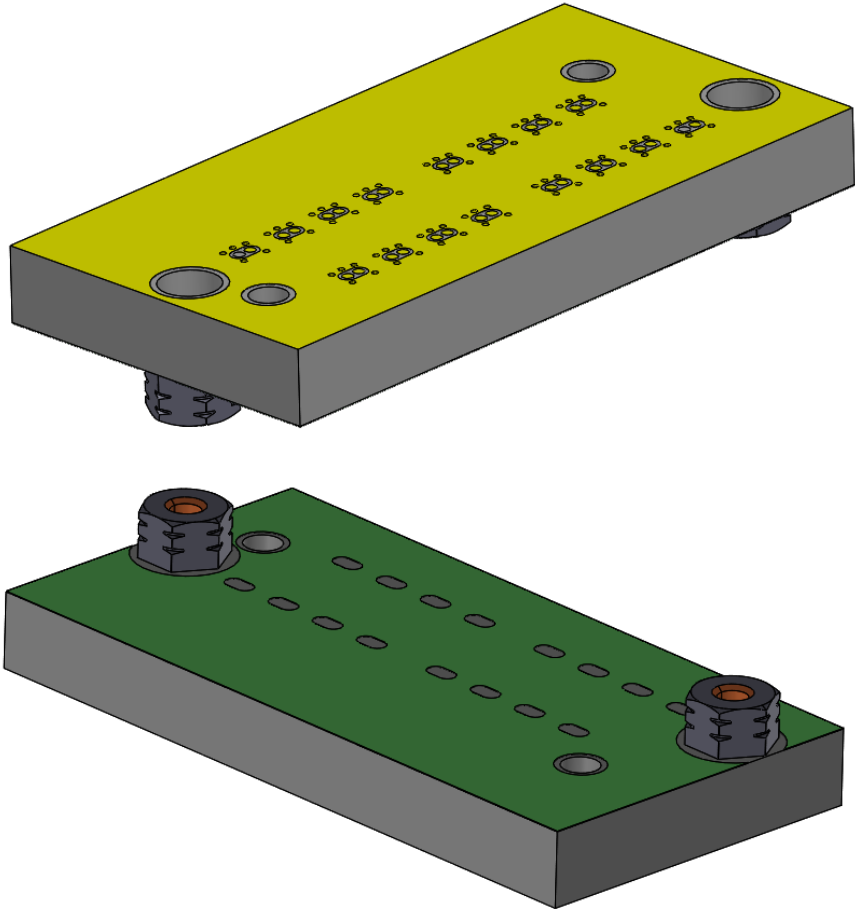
SMT M1.6 NUTS MOUNTED ON THE BACK OF THE PCB
